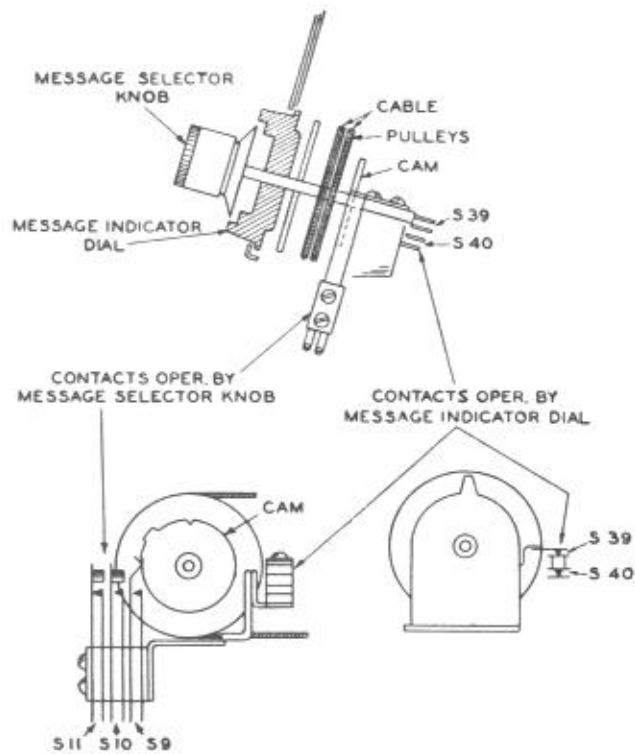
Message Selector Knob and Indicator Contact Assemblies
